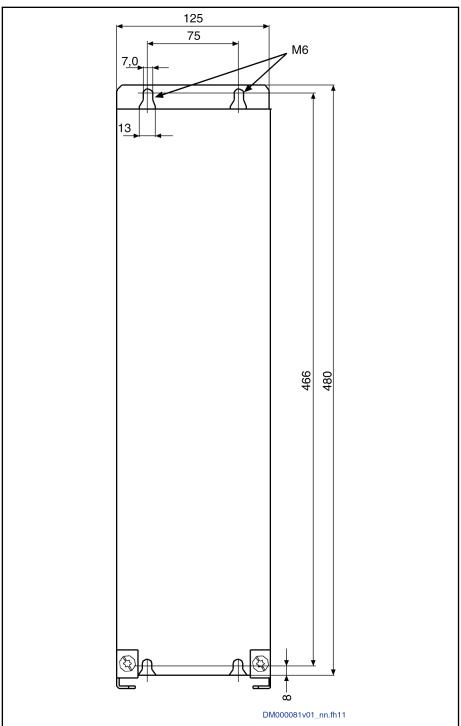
Boring dimensions HCS03.1E-W0070
